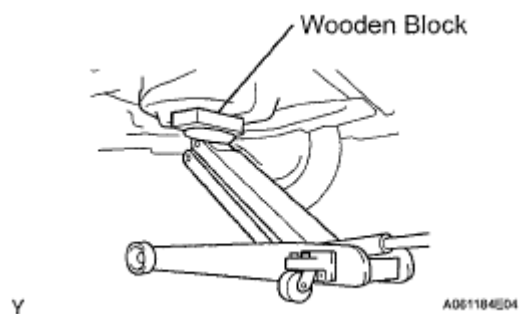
Placing Wooden Block Between Floor Jack And Engine
